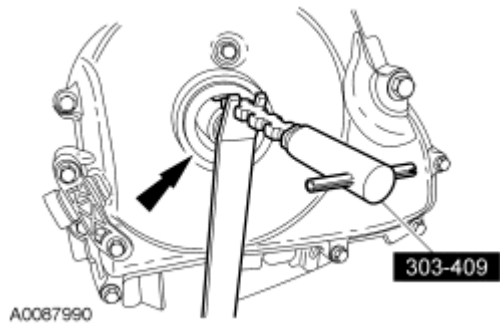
Identifying Special Tool (303-409) And Crankshaft Front Oil Seal
